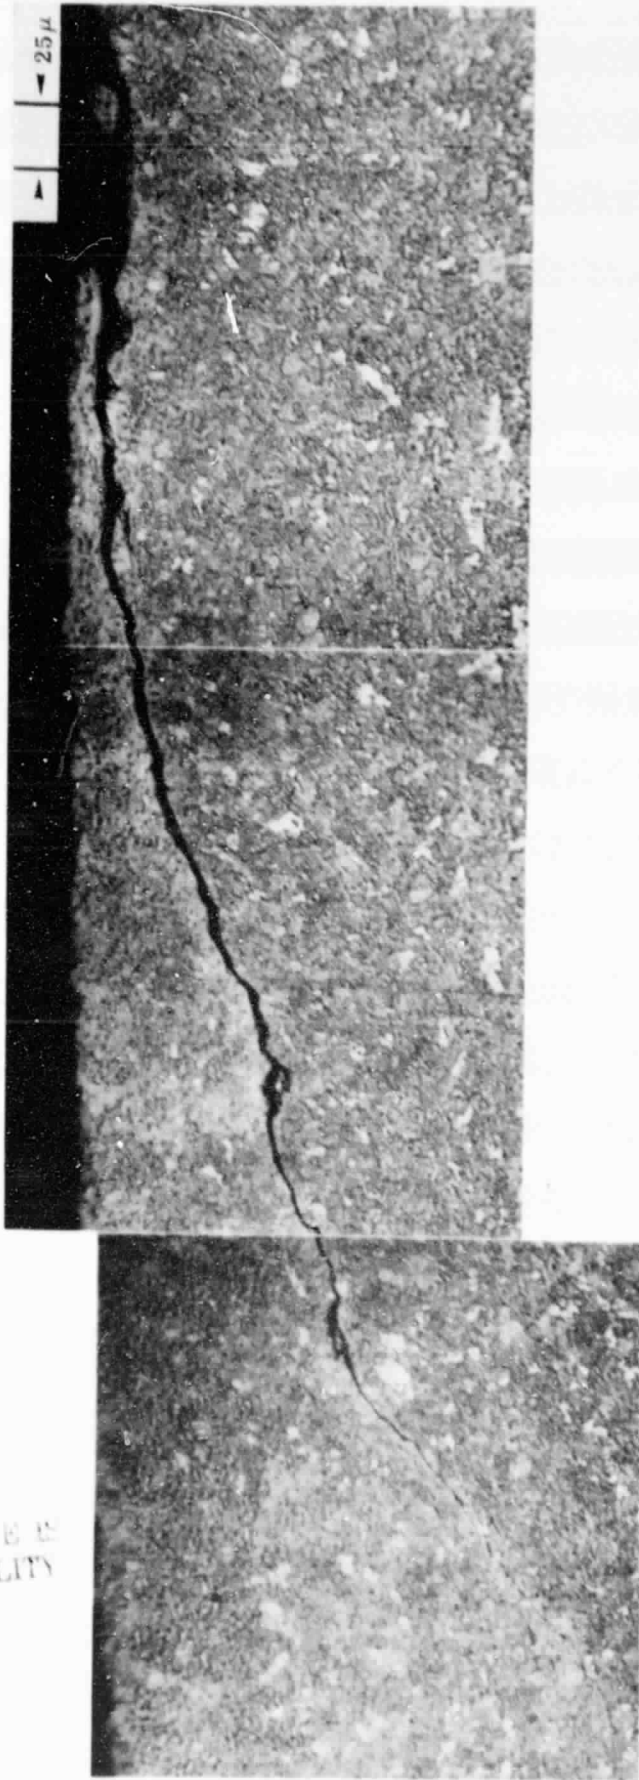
Shallow surface crack in spalled ball from HPOTP 9008 bearing in Engine 2502. Crack depth approximately 0.18 mm (0.007 in.).
